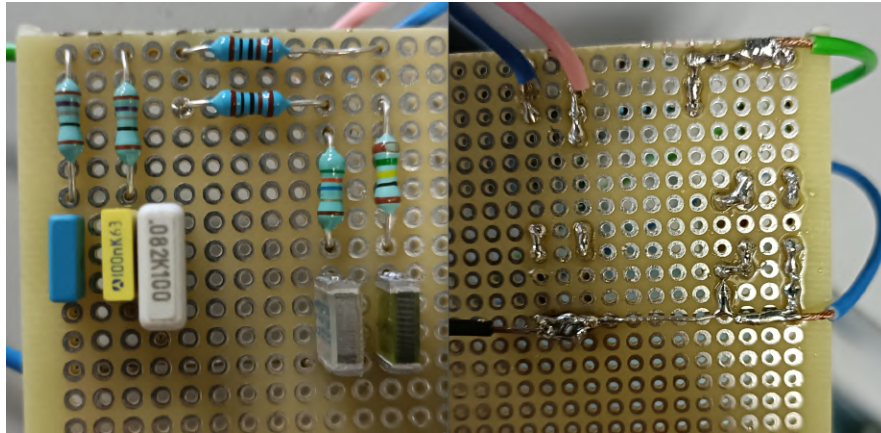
Front side (on the left) and back side (on the right) of the adapter circuit for the toroidal component on a larger circuit board.
